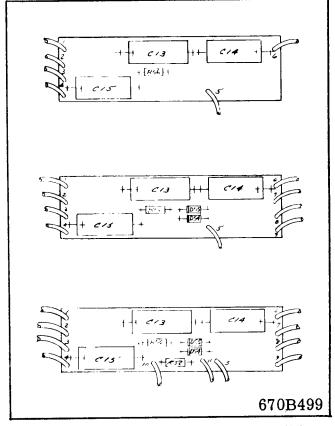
Printed Circuit Board Assembly for SDG, SDG-1, 2, 3, & 4 Relays
